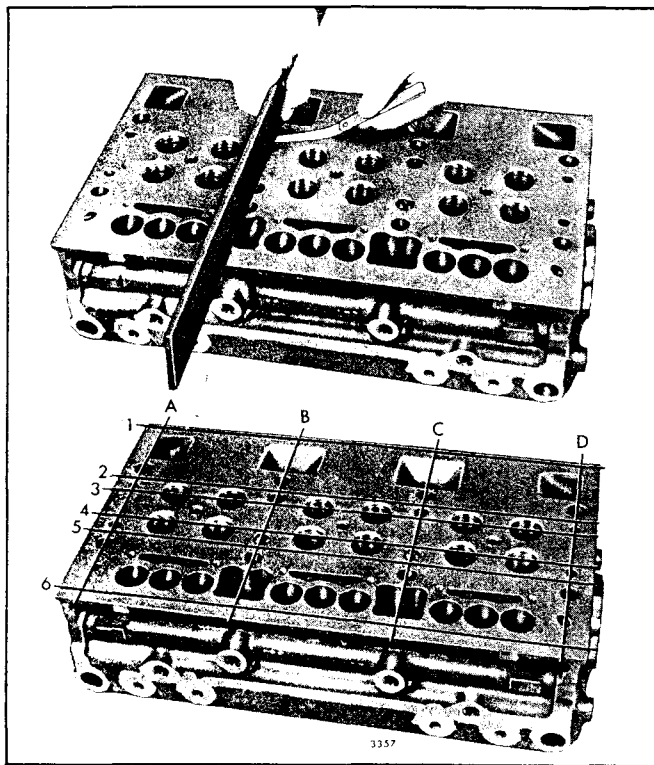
Checking Bottom Face of Cylinder Head for Warpage
